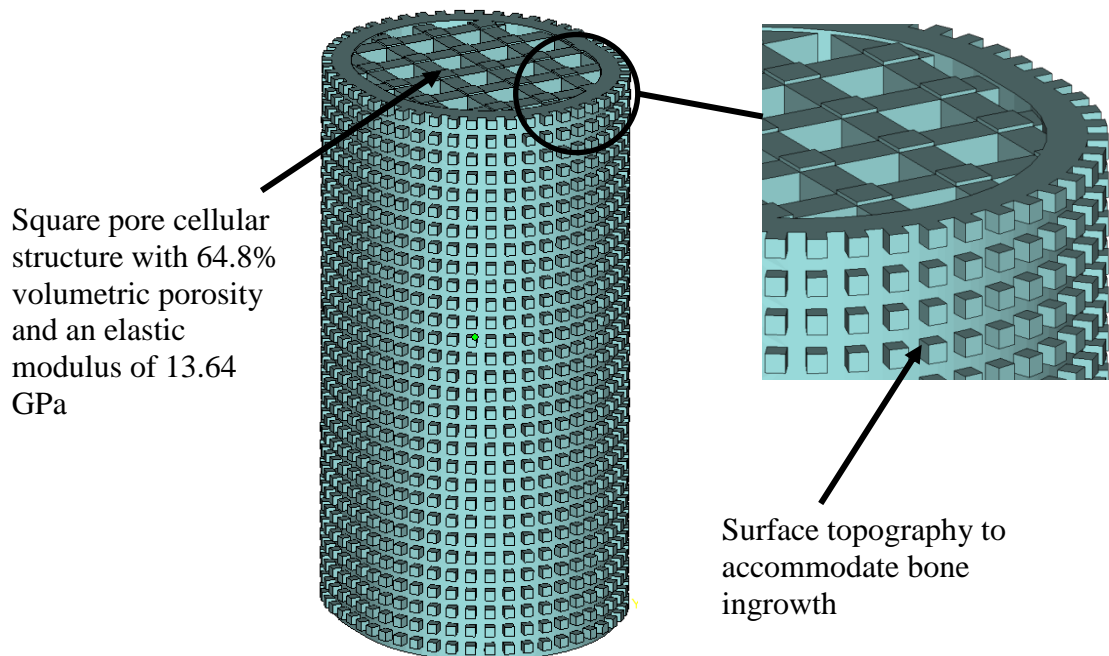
CAD model showing a cross section of the proposed cemented stem.
